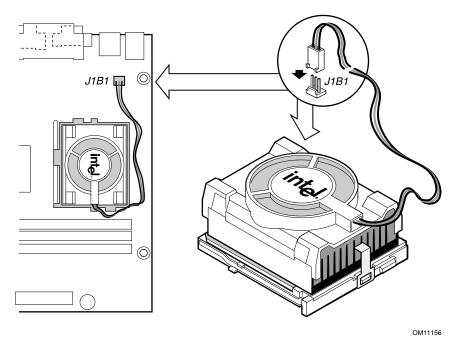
Connecting the Processor Fan Cable to the Processor Fan Connector
